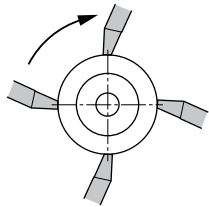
Checking the axial alignment with a calliper gauge – circumferential check
